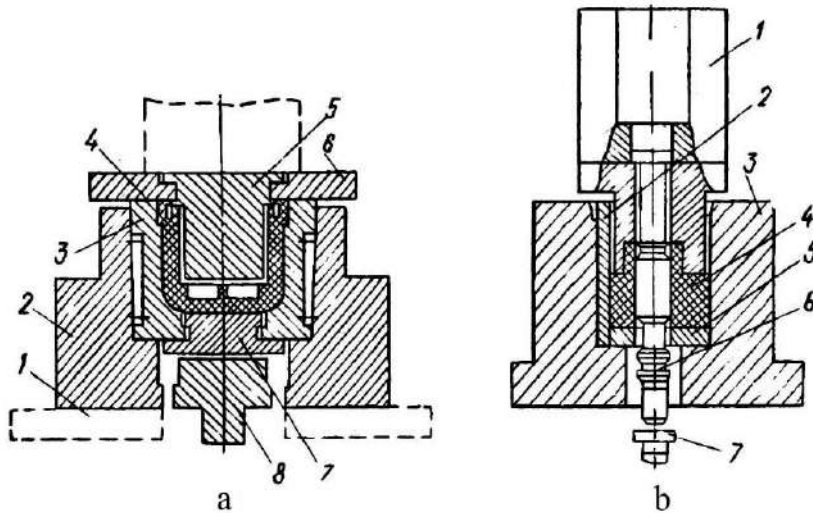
Worn-part reclamation of pump of HIII-Y type by compression: a – frame; 1 – press base; 2 – mold; 3 – matrix block; 4 – pump casing; 5 – punch; 6 – plate; 7 – ring, 8 – ejector; b – bushing; 1 – punch; 2 – bush; 3 – matrix; 4 – bushing; 5 – washer; 6 – tool; 7 – ejector
